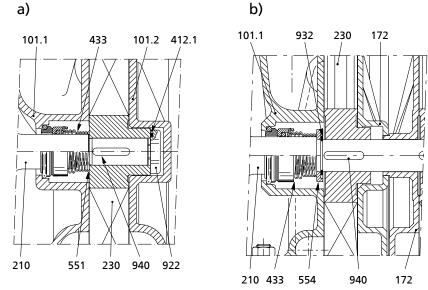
Mechanical seal design T, operating mode B a) Sizes 40-146, 50-164, 60-200, 65-200, 80-240-11 and 80-240-15 b) Sizes 42-146 and 52-164
